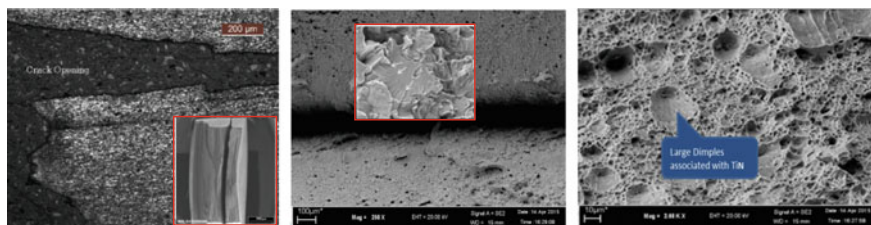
Spilling in HS 800: large TiN shown in fractograph of as-rolled sample
